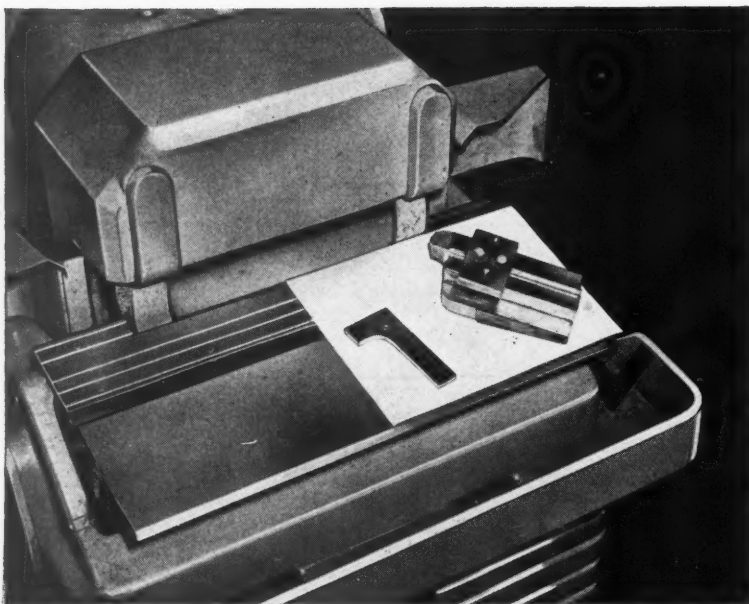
To obtain tools uniformly ground with proper clearances and profiles, gages and jigs are employed in tool grinders operated by trained personnel
